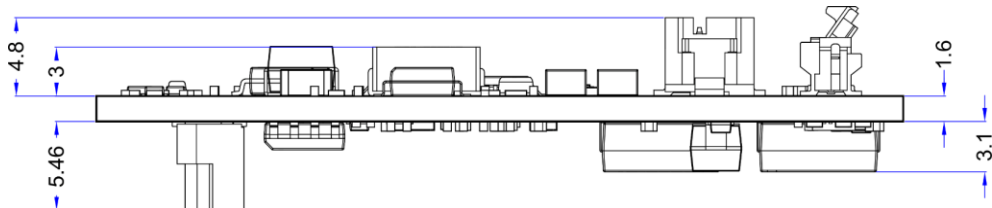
Toradex DSI to LVDS Adapter Dimensions (mm) – side 1, side 1 view
